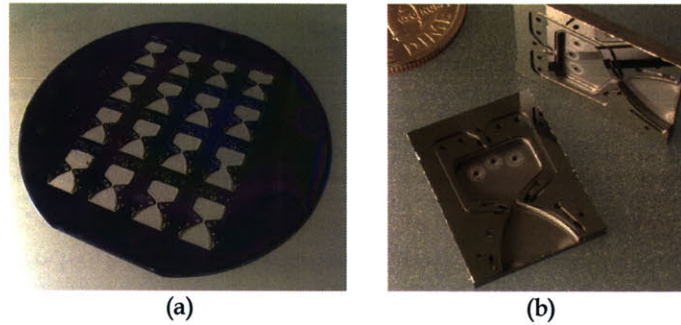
Micro-rocket thrust chamber. (a) Sixteen identical layers of the micro-rocket thrust chamber on a 100 mm wafer [18]. (b) Two halves of micro-rocket thrust chamber and nozzle; nozzle exit is 7.5 mm wide [17].
